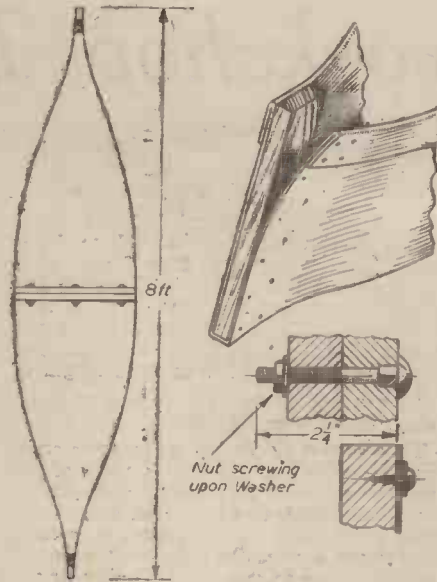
Plan of two boats joined together to make a canoe, with screwing and bolting sections.
